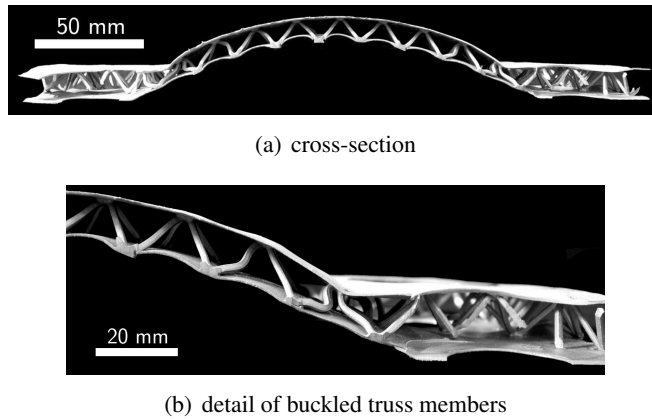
Cross-section of AISI 304 stainless steel sandwich panel with pyramidal truss core after blast loading.
